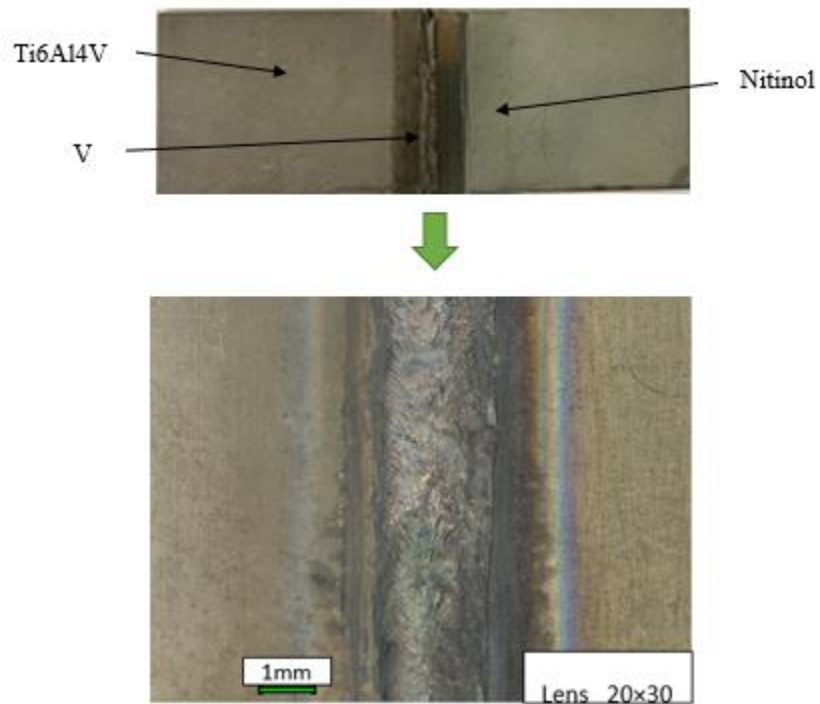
Welded samples with Vanadium interlayer
